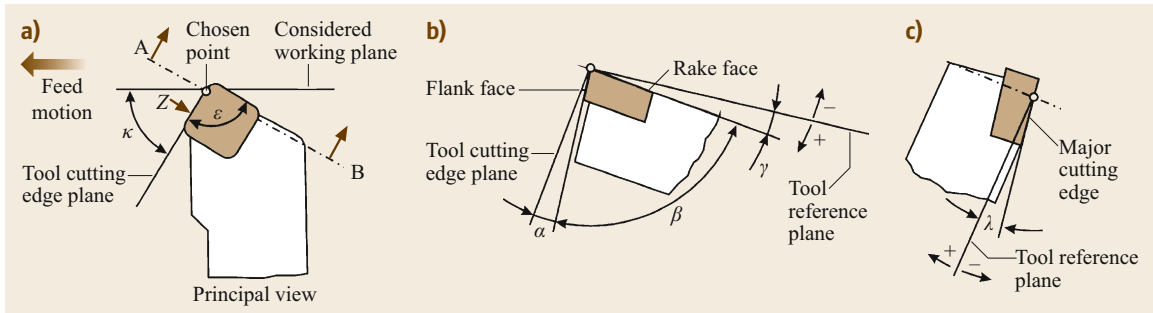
c Single-point cutting tool angles [12.6]. (a) Principal view; (b) A-B (tool-orthogonal plane); (c) view Z (on tool cutting edge plane)
